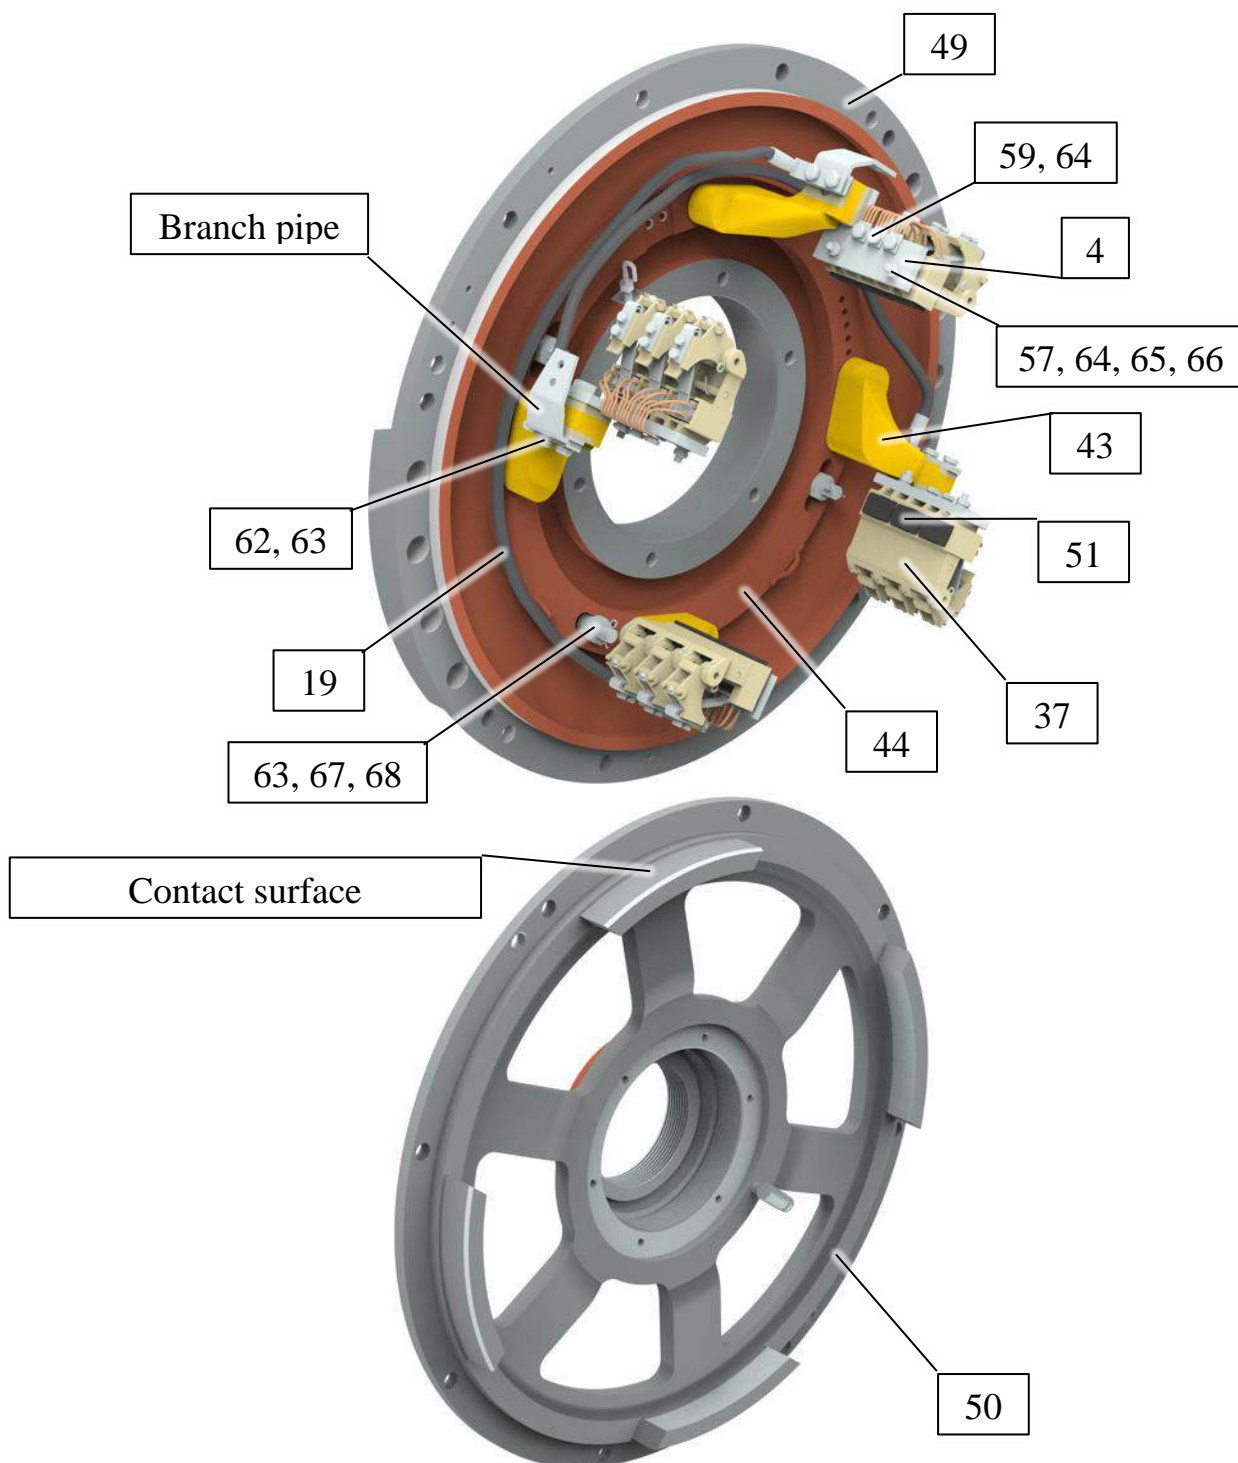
Bearing Shields of EDP-600 and EDP-600S Electric Motors
